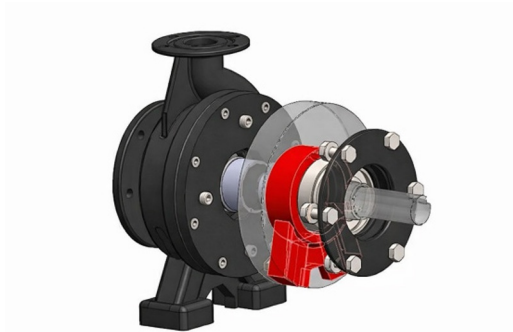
Interference detection analysis in SolidWorks: The red volume indicates a dimensional conflict between the shaft and the bearing inner ring.
